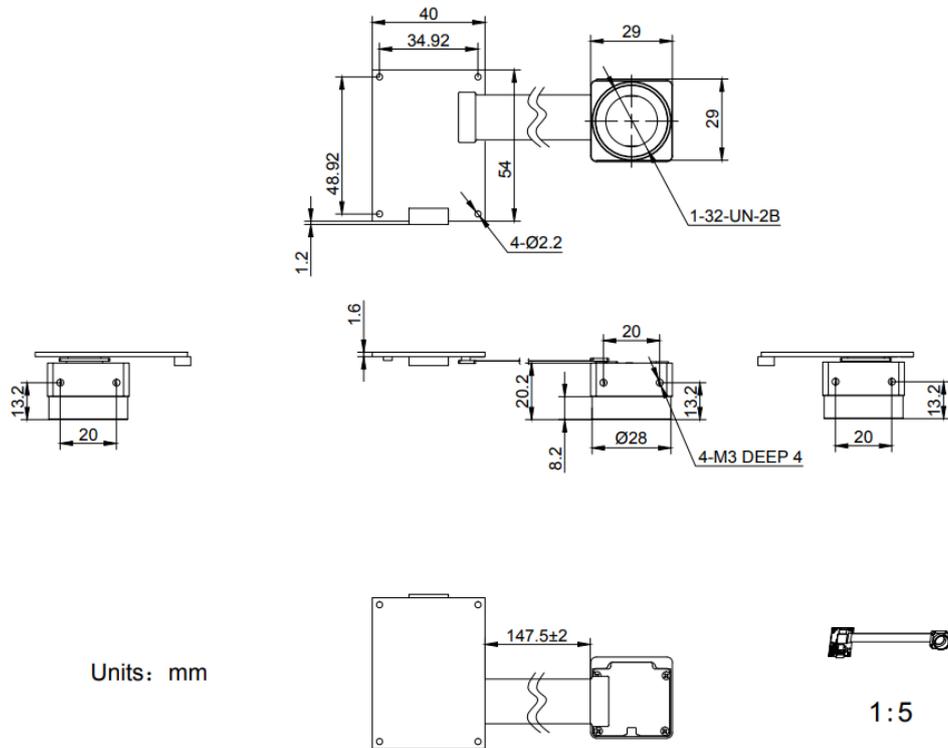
Split USB3.0 camera mechanical dimensions (C-Mount)
